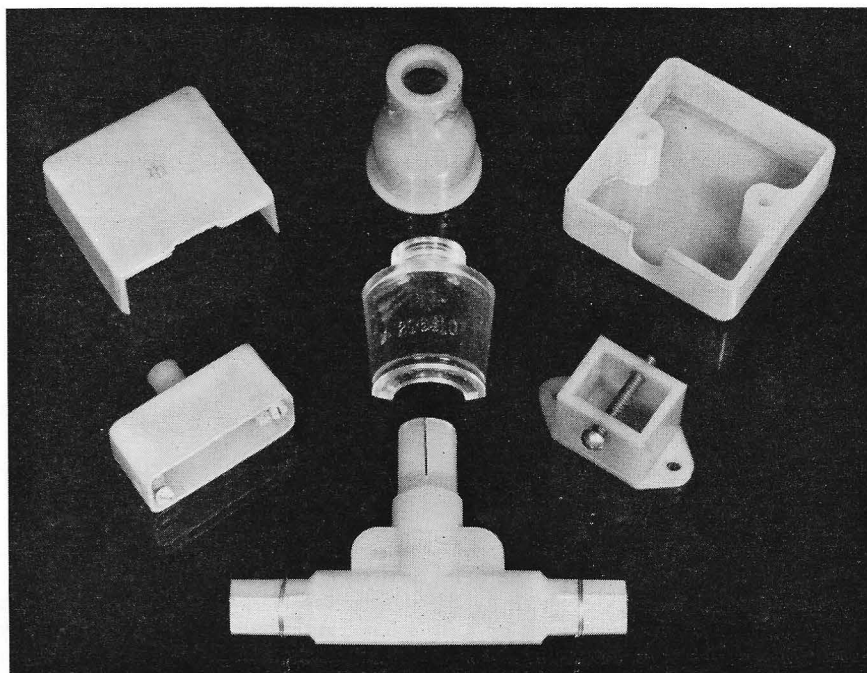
Injection moulding of plastics (nylon and polystyrene) has proved invaluable for producing special parts for aircraft electrical systems, which would otherwise have been machined from the solid. This photograph shows a selection of parts made in this way
